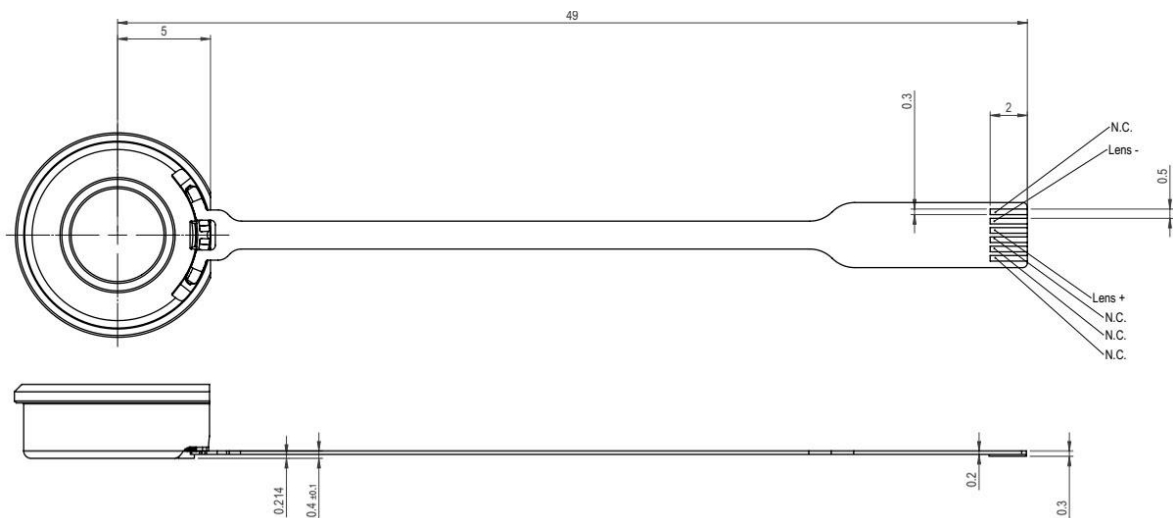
Mechanical drawing of the EL-3-10-XXX-26D-FPC lens
